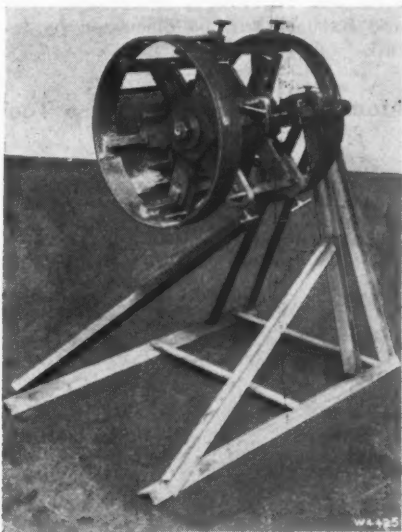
Motor frame welding fixture built entirely by arc welding. The motor frame is shown in position.
